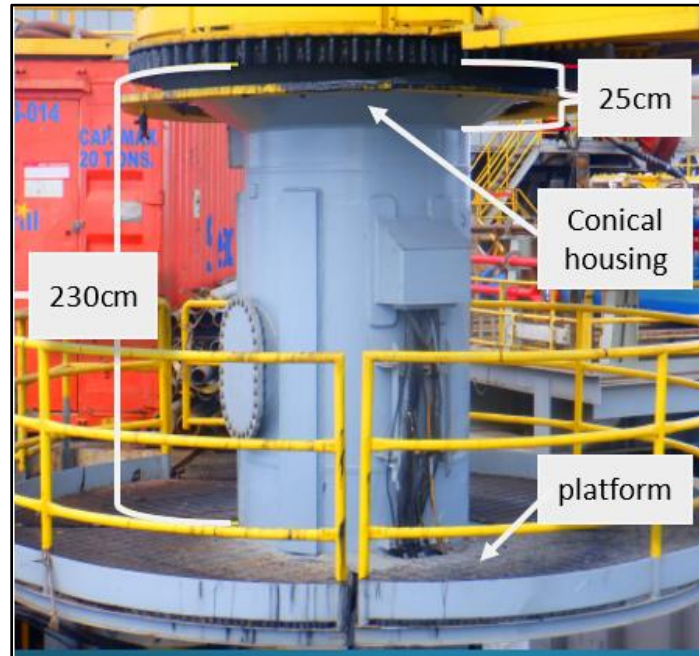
Height and location of the welded conical housing of the no.3 crane on WC for illustration (*Source: the Company*)
